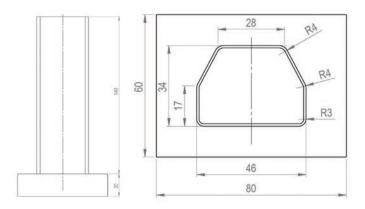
Dimensions for the tube type 316L stainless steel test specimens.
